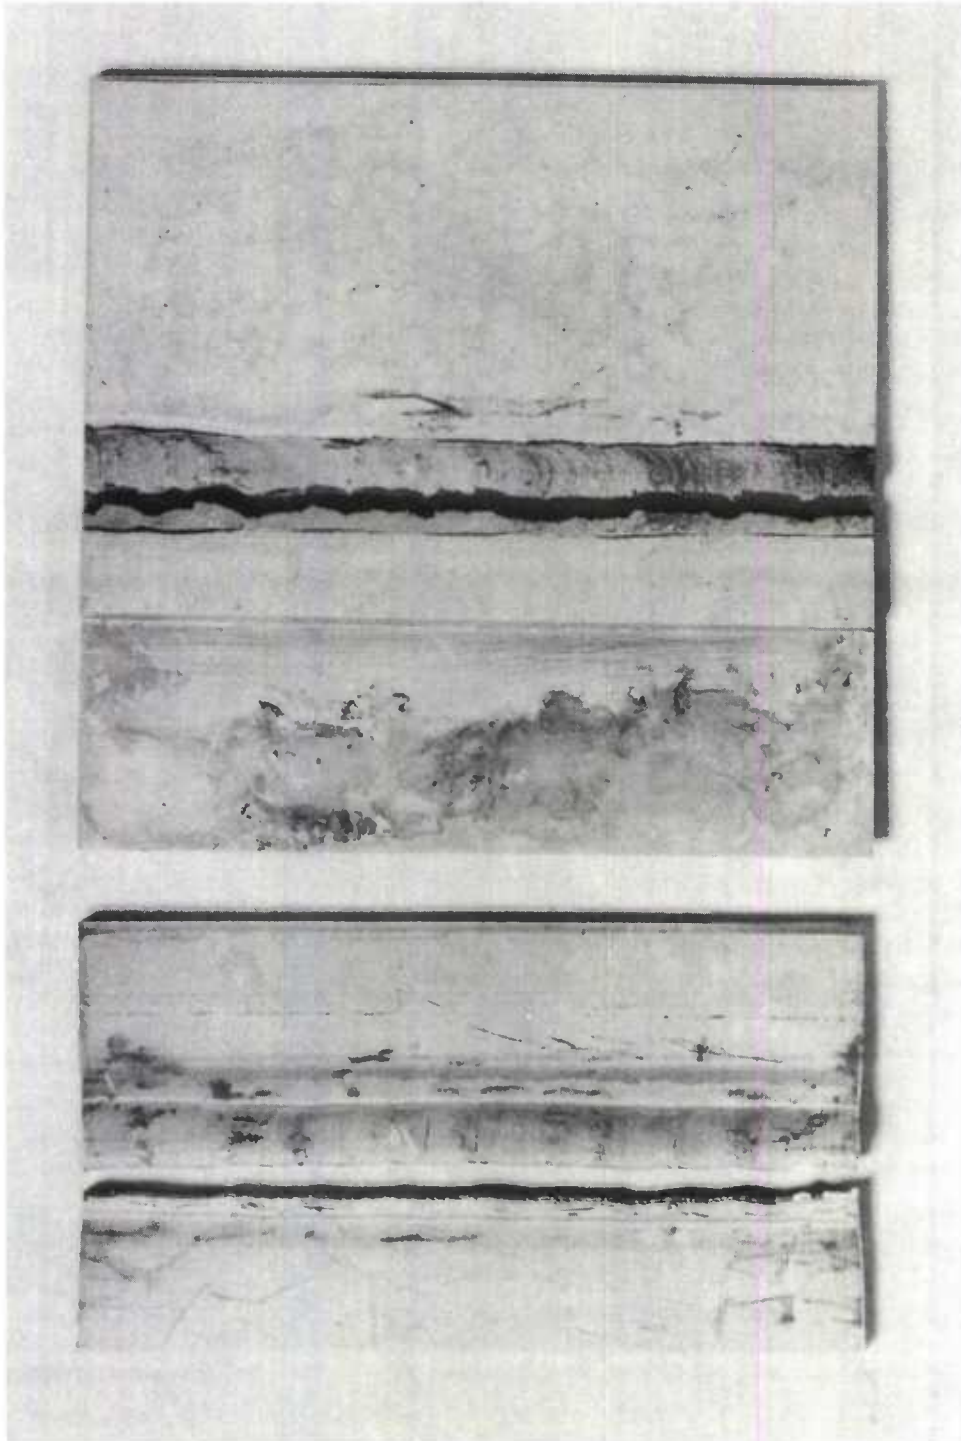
Fractured Fatigue Specimens - 5456-H343 Aluminum Alloy (-320°F)
